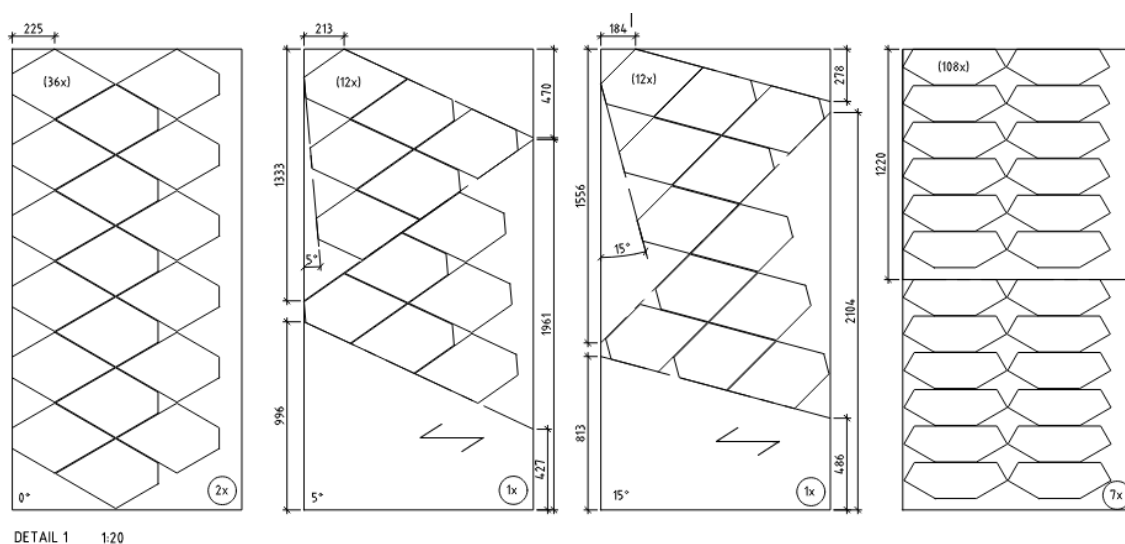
Cutting pattern for plywood plates, see drawing K-20-2-1002, Appendix D
